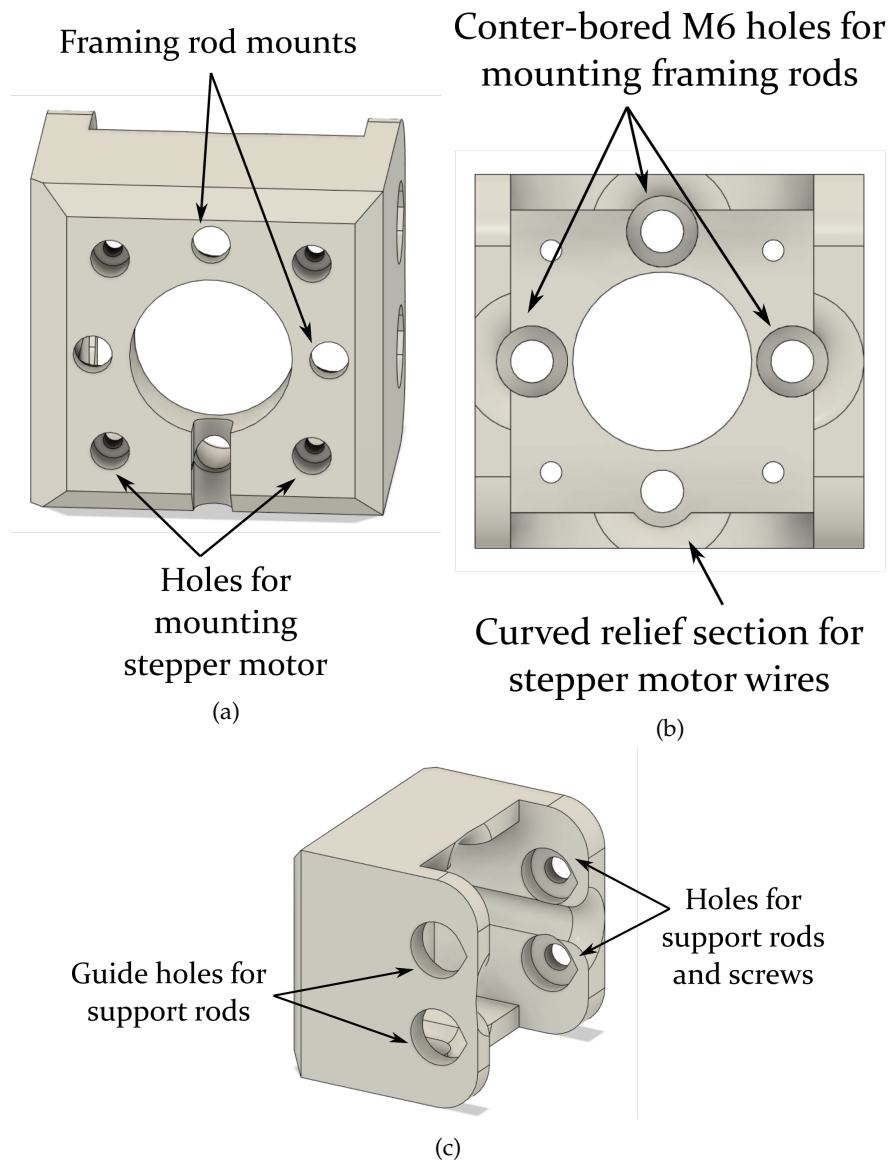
CAD drawings of the stepper motor adapter. (a) Front face showing M3 mounting holes for the stepper motor, and M6 holes for fixing the framing rods to the face of the adapter. (b) back view showing the counter-bored M6 holes for the framing rods. (c) Side view showing the guide holes and end-stop holes for mounting the support rods with M6 screws.
